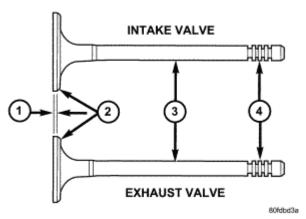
Identifying Intake & Exhaust Valves Courtesy of CHRYSLER LLC
